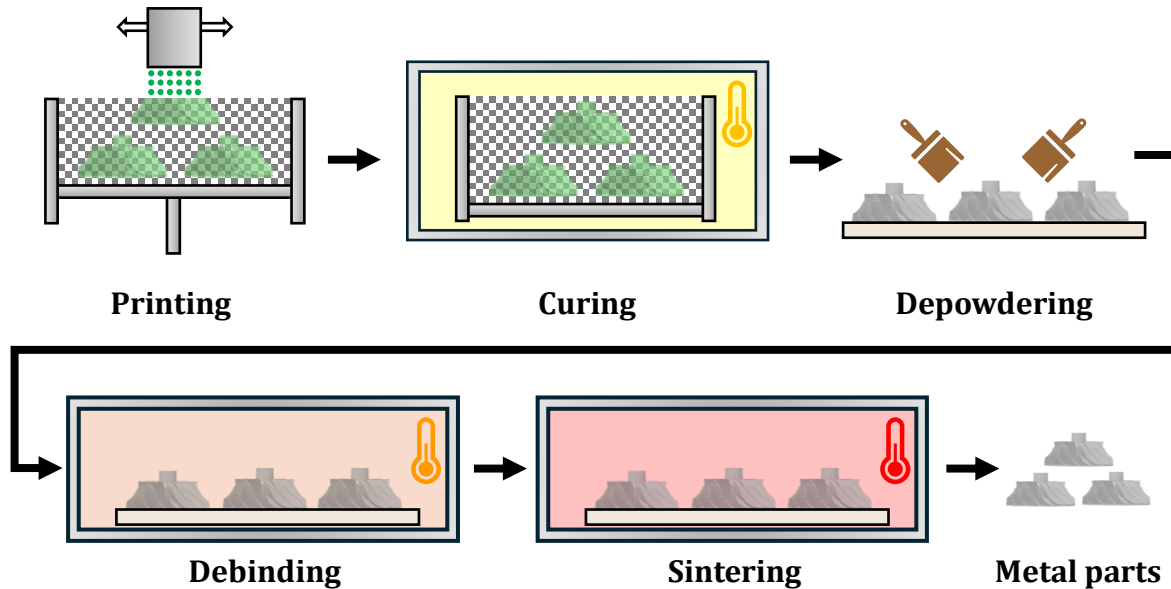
Sketch of the BJT process chain for metal parts consisting of printing, curing, depowdering, debinding and sintering.
